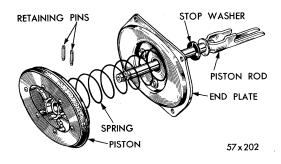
Removal of Vacuum Piston, Spring and Piston Rod
